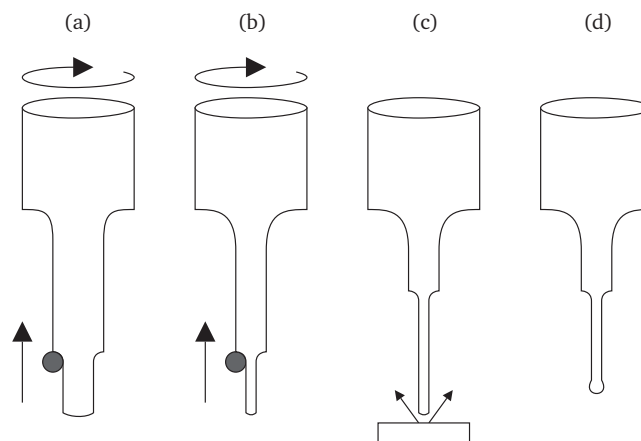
Schematic of EDM manufacturing of micro probe tips: (a) rough machining of stylus, (b) finish machining of stylus, (c) discharge manufacturing of tip, (d) finished stylus with tip.
